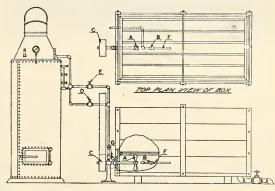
Plan of the Bellingham Bulb Station sterilizer: A, propeller; B, injector; C, propeller pulley; D, needle valve; E, globe valve; F, a 10-inch piece of 1-inch pipe; G, grease cup
